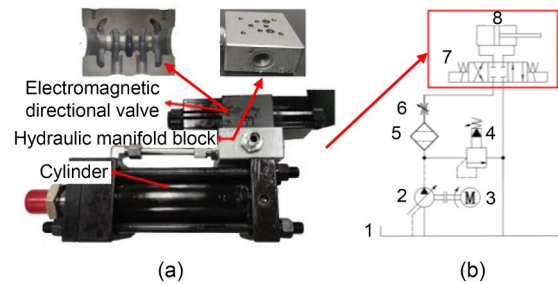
(a) Conventional machined valve-controlled cylinder; (b) schematic of the hydraulic transmission system. 1: tank; 2: pump; 3: motor; 4: relief valve; 5: filter; 6: throttle valve; 7: electromagnetic directional valve; 8: hydraulic cylinder
